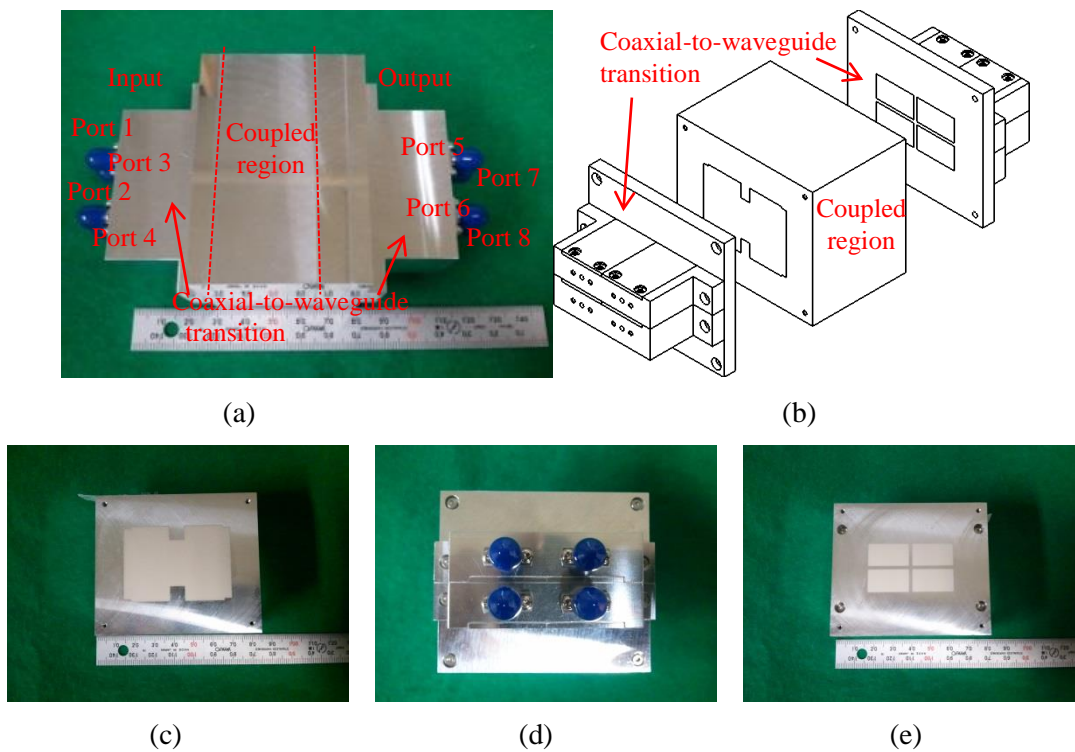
Fabricated short-slot 2-plane coupler (a) Assembled scene (b) Drawing (c) Frond view of the coupled region part (d) Ports of the coaxial-to-waveguide transition part (e) Waveguides of the
